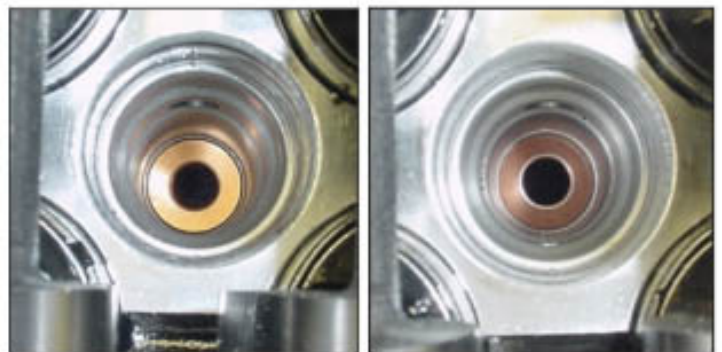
Using Extractor Tool pin to guide copper packing
